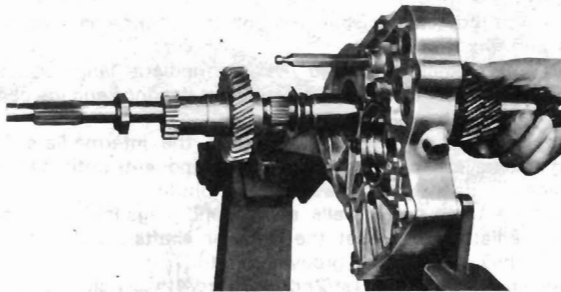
Removing the input shaft from the intermediate flange (Sec 7)
